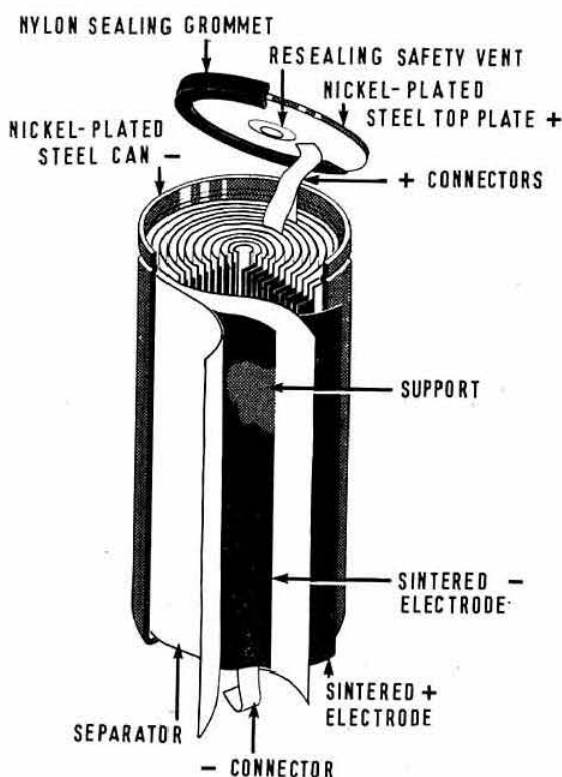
Exploded view of construction of typical nickel-cadmium cell
